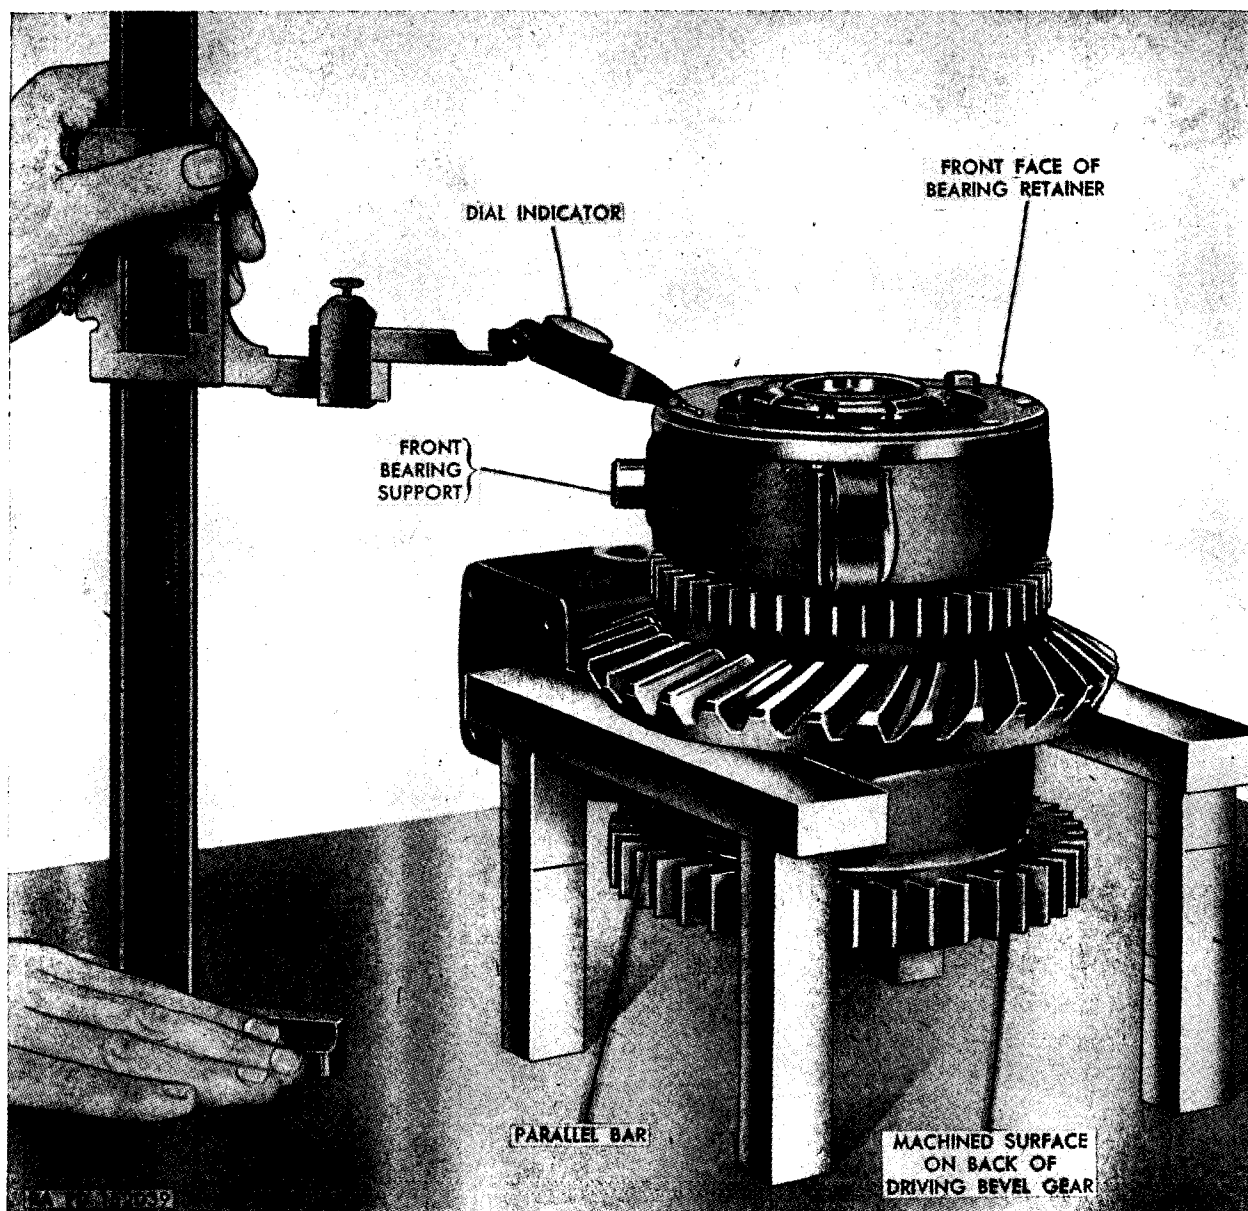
Measuring distance between bevel gear back and bearing retainer face.
